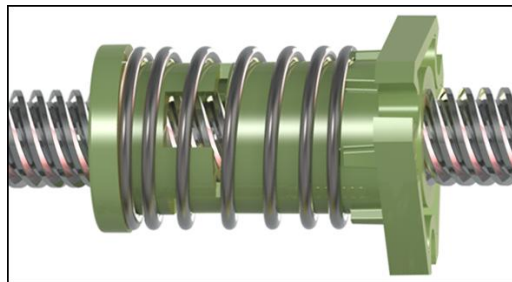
Lead screw assembly with two-pieces nut (anti-backlash)
